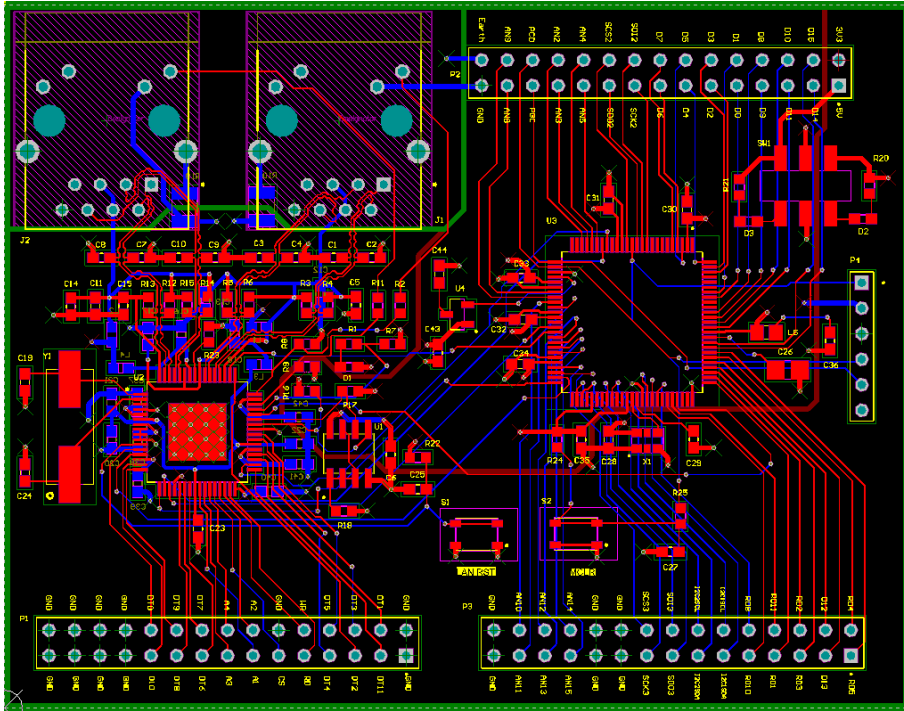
PCB design of EtherCAT slave Controller Board.
